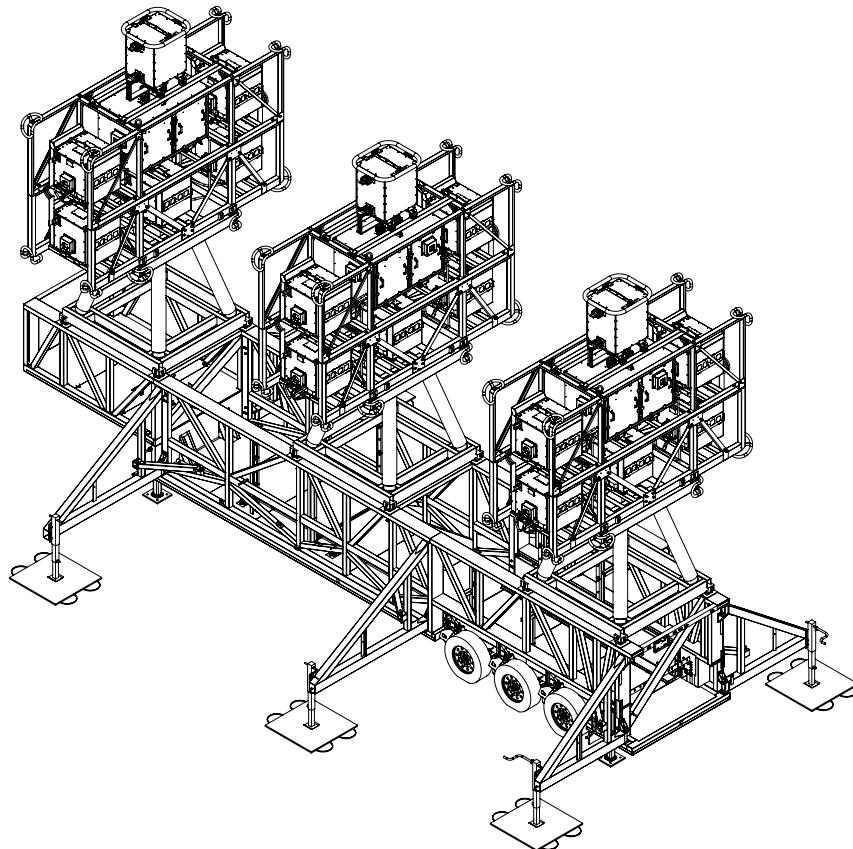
Mobile SmartValve Unit – Deployment Configuration Isometric View
